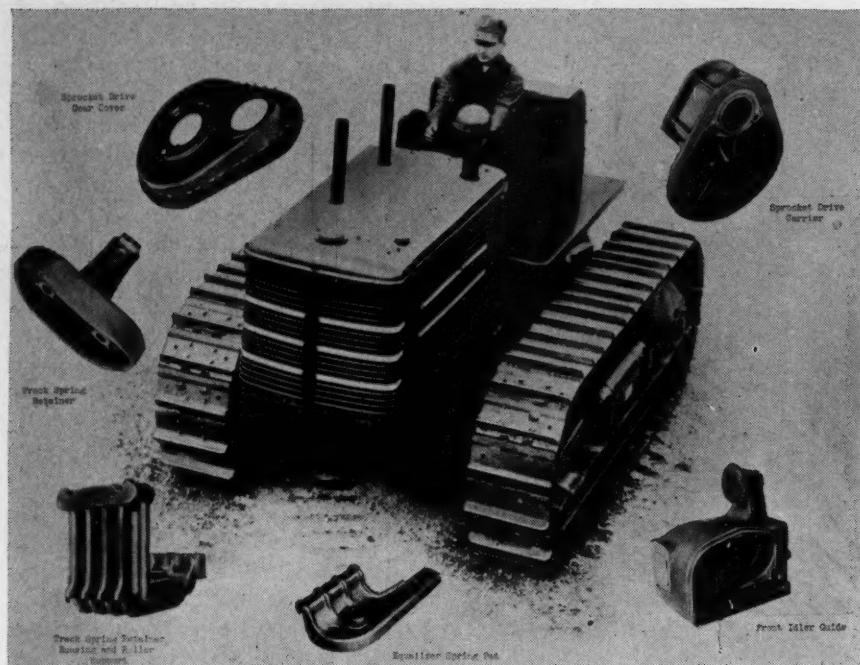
Army Tractor and Some of the Malleable Castings It Contains.
